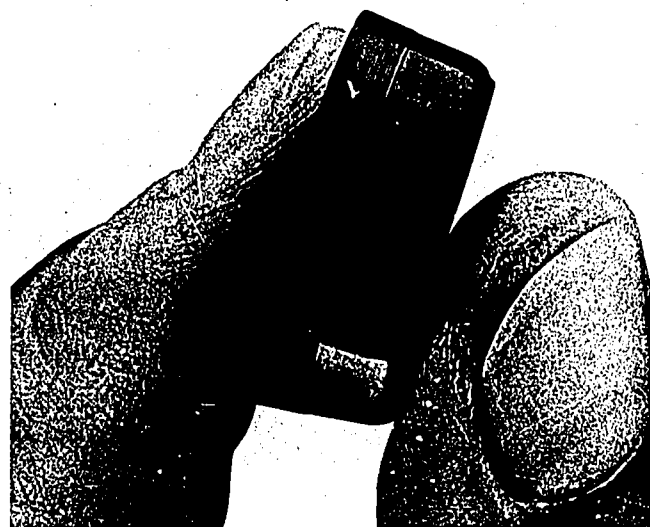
Molded rubber products come in many different sizes and shapes.
